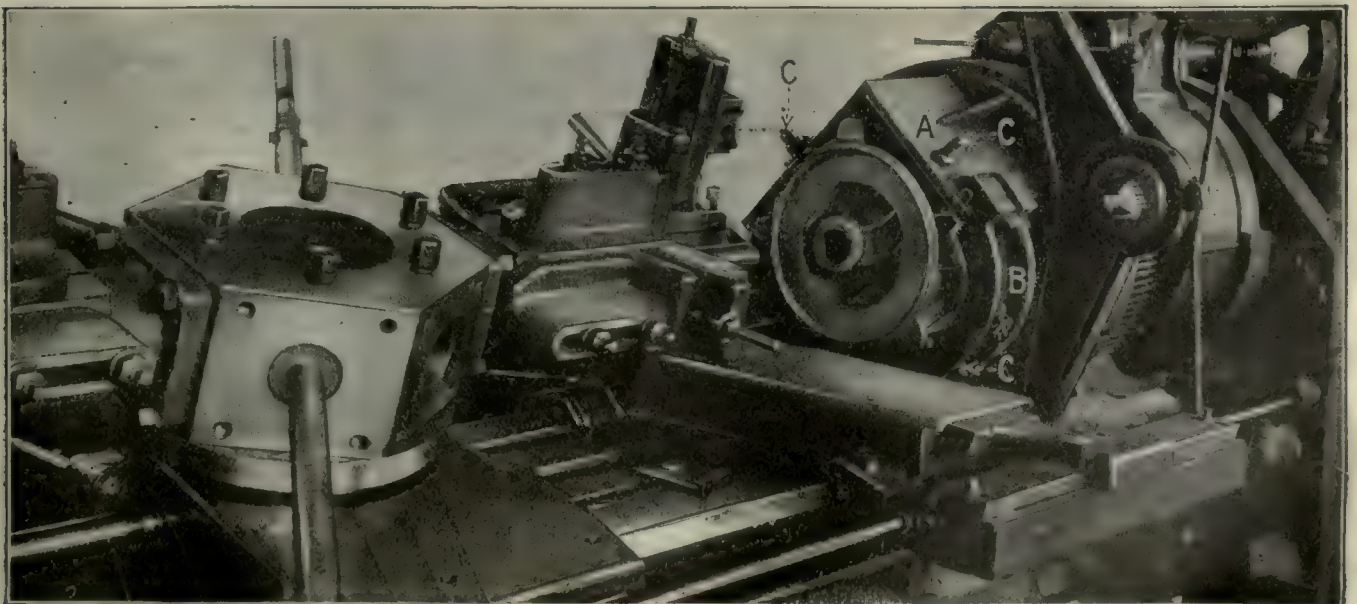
FACING AND BORING FLYWHEEL SIDE OF CRANKCASE
